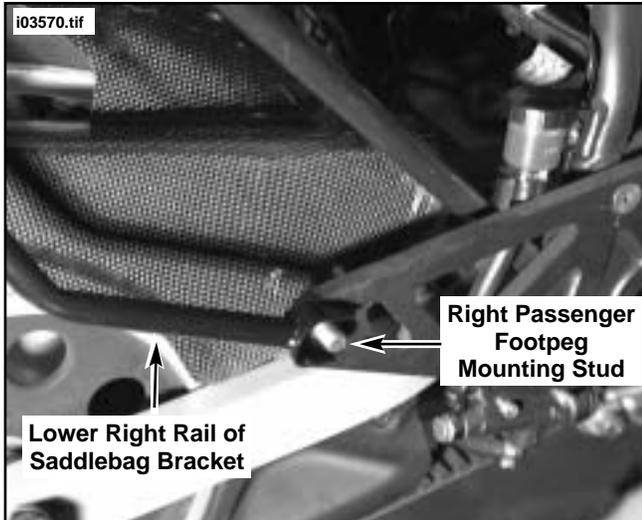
Place Lower Mounting Bracket Rails onto Footpeg studs (Right Side Shown)
